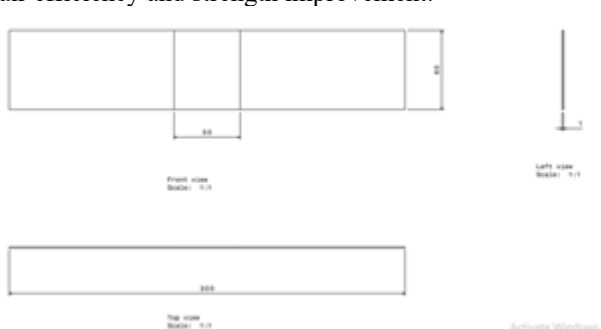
Figure Drafting view of aluminum sheet plate without crack & patch
